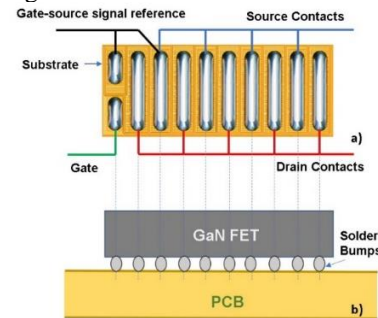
a) solderable bars package solution with the connection of the Source, Drain, Gate and Substrate contacts. b) Package and PCB assembly.
